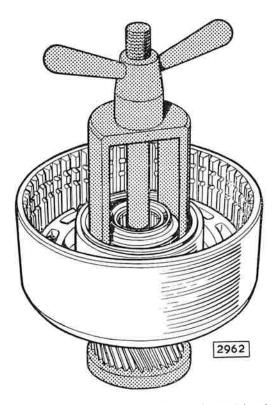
Dismantling the clutch using the special tool (Part No. CBW37A).
